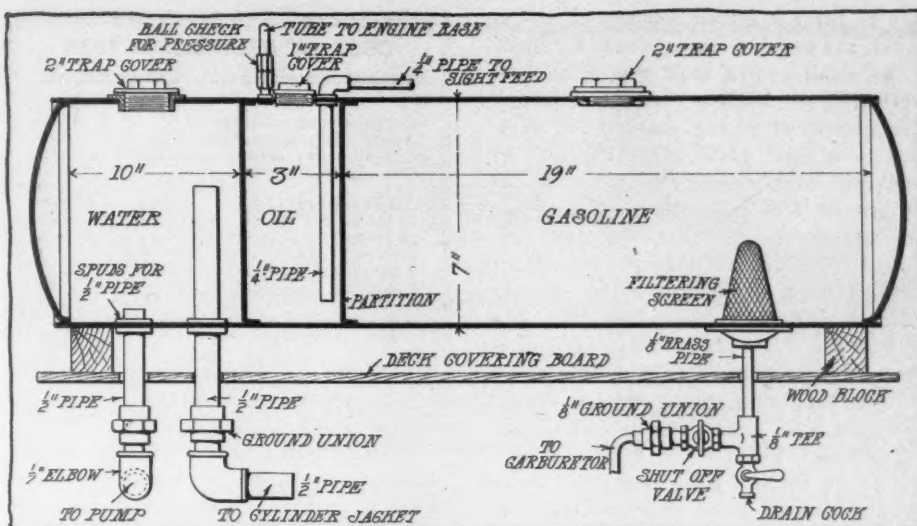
SECTIONAL VIEWS OF THREE-COMPARTMENT TANK SHOWING ARRANGEMENT OF THE VARIOUS LIQUID CONTAINERS IN ONE ASSEMBLY. DIAGRAM OF OIL SUPPLY SYSTEM AND METHOD OF SECURING TANK TO REAR DECK FIXED PORTION
